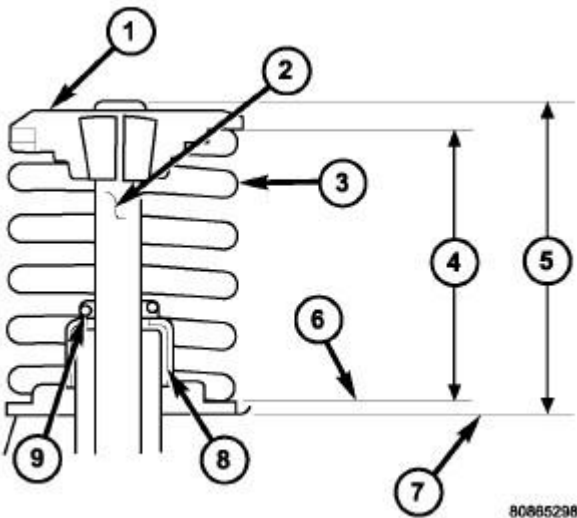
Valve Tip Height & Valve Spring Installed Height
